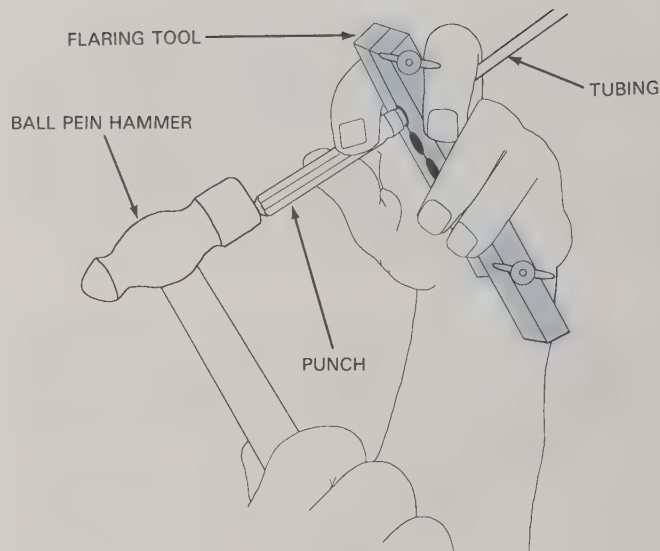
A punch-type swaging tool uses a flaring block to hold the tubing and a hammer and punch to stretch the tubing end.
